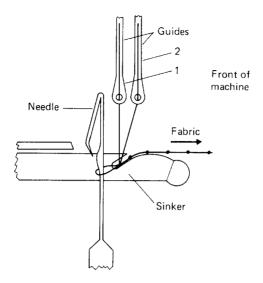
Knitting elements in a bearded needle tricot machine.
